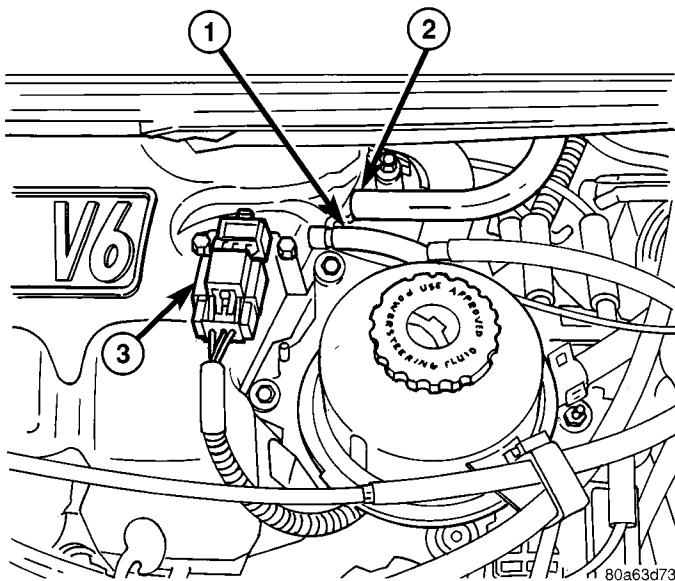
BRAKE BOOSTER & LDP VACUUM HOSES
